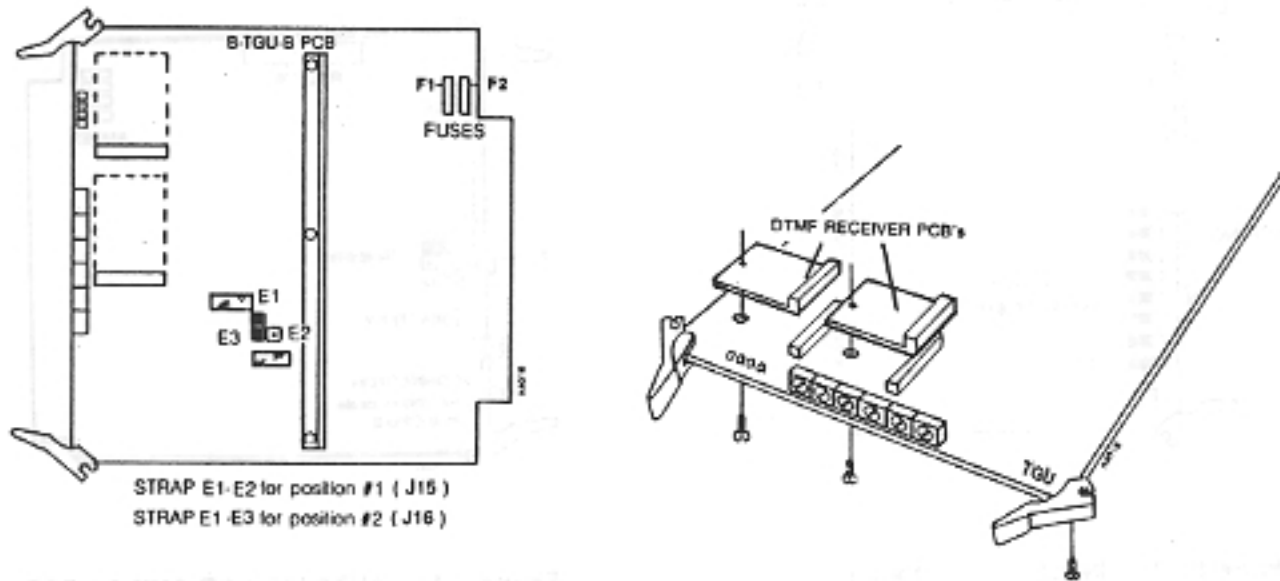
TONE GENERATOR ( B-TGU-B ) PCB
